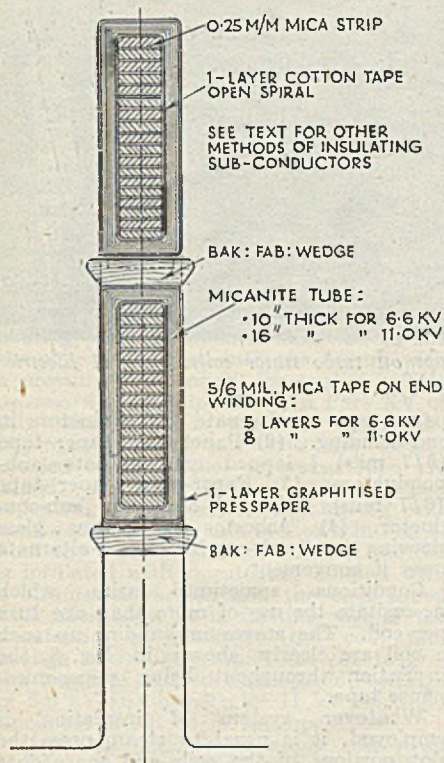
Stator winding for 6600 V turbo-alternator, insulated throughout with mica-paper tape (B.T.H. Co., Ltd.)
